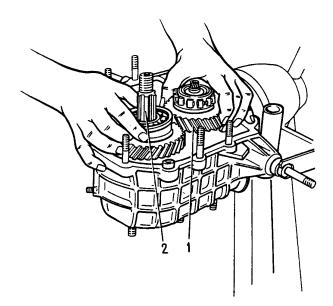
Installation of Drive Shaft and Countershaft:
